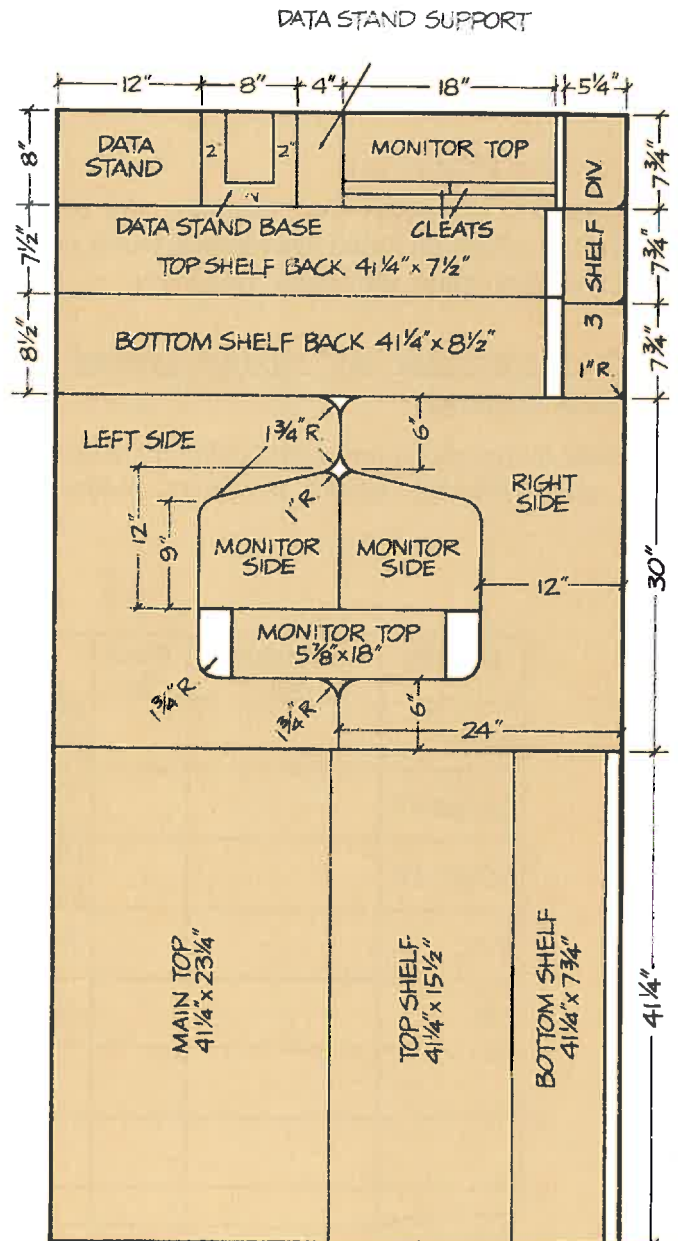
Laying out components on a sheet of plywood. Remember to leave room for saw kerfs when laying out dimensions. (APA-The Engineered Wood Assoc.)
